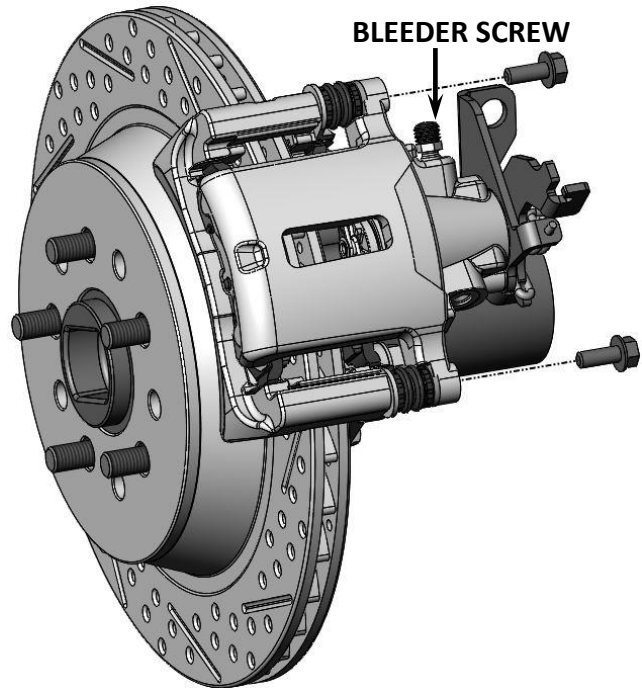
Caliper Installation and Bleeder Screw Orientation
